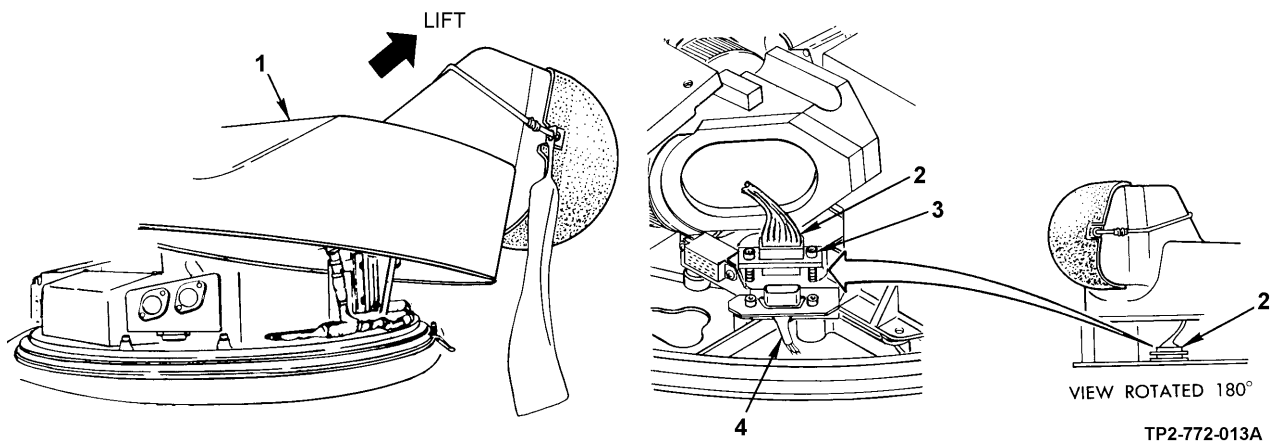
Shroud Cable Connector P1 Removal from PNV5 NSA
